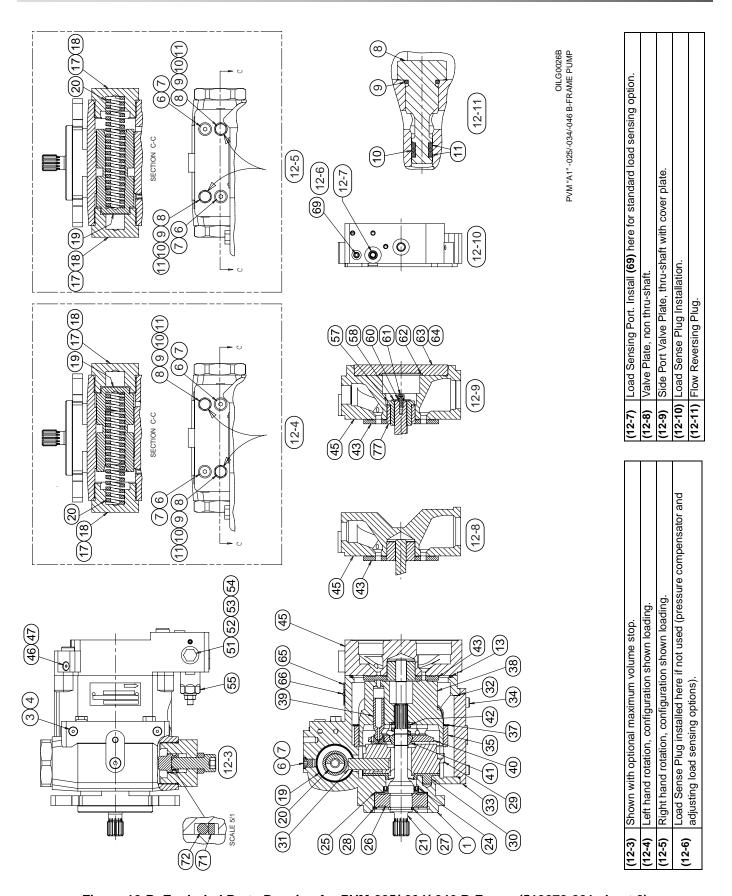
B. Exploded Parts Drawing for PVM-025/-034/-046 B-Frame (519272-201 sheet 2)
